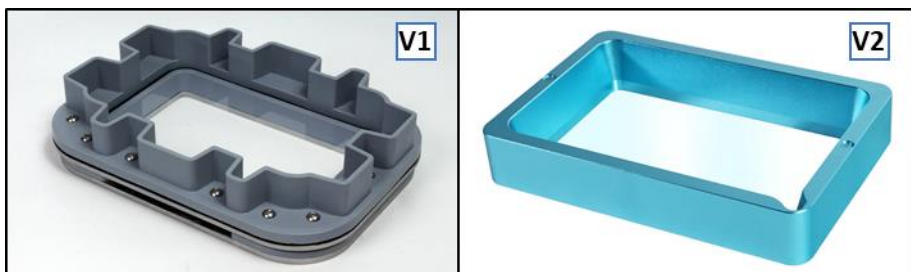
Different vats tested. Both V1 and V2 version consisted of flexible FEP film bottom. V1 version is an assembly of 3D printed ABS parts and aluminum; V2 is made of anodized metal parts only.
